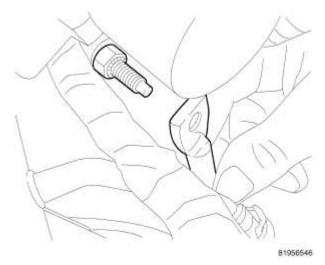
Removing/Installing Brace For Throttle Body Courtesy of CHRYSLER LLC
